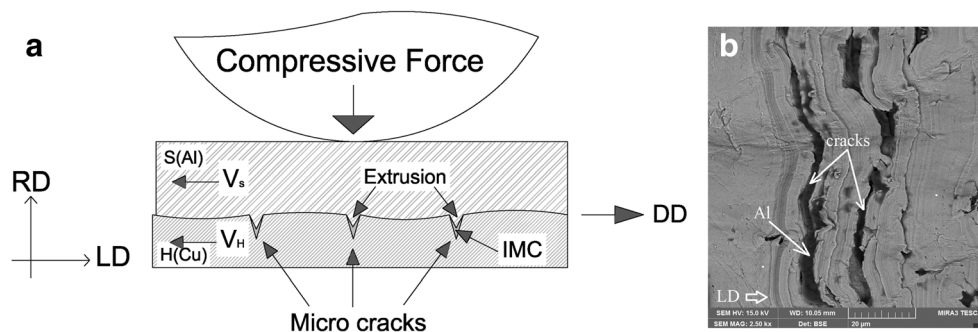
a Schematic image of the cold pressure welding mechanism, b BSE image of the copper surface at the interface for the acc specimen
